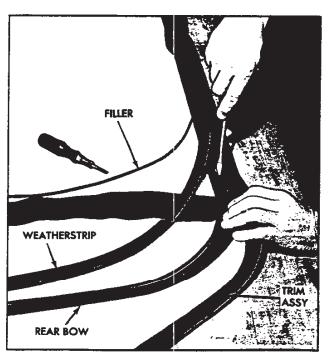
Installing Trim and Weatherstrip to Rear Bow
